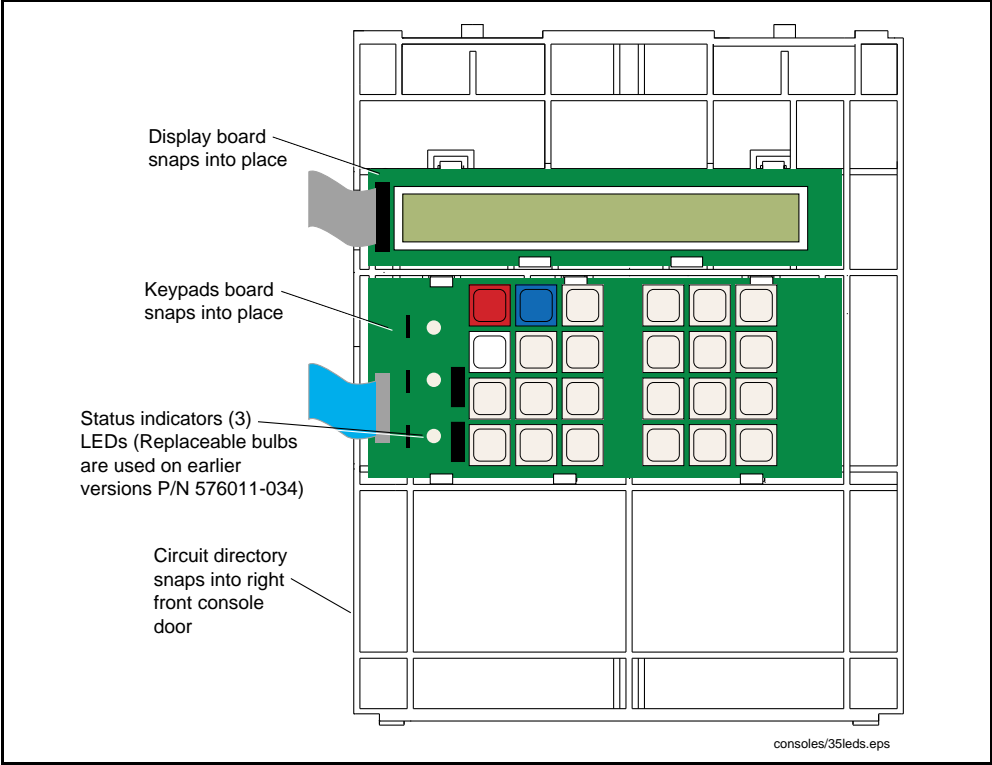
Console Display/Keyboard Board Components (Behind Right Door)
